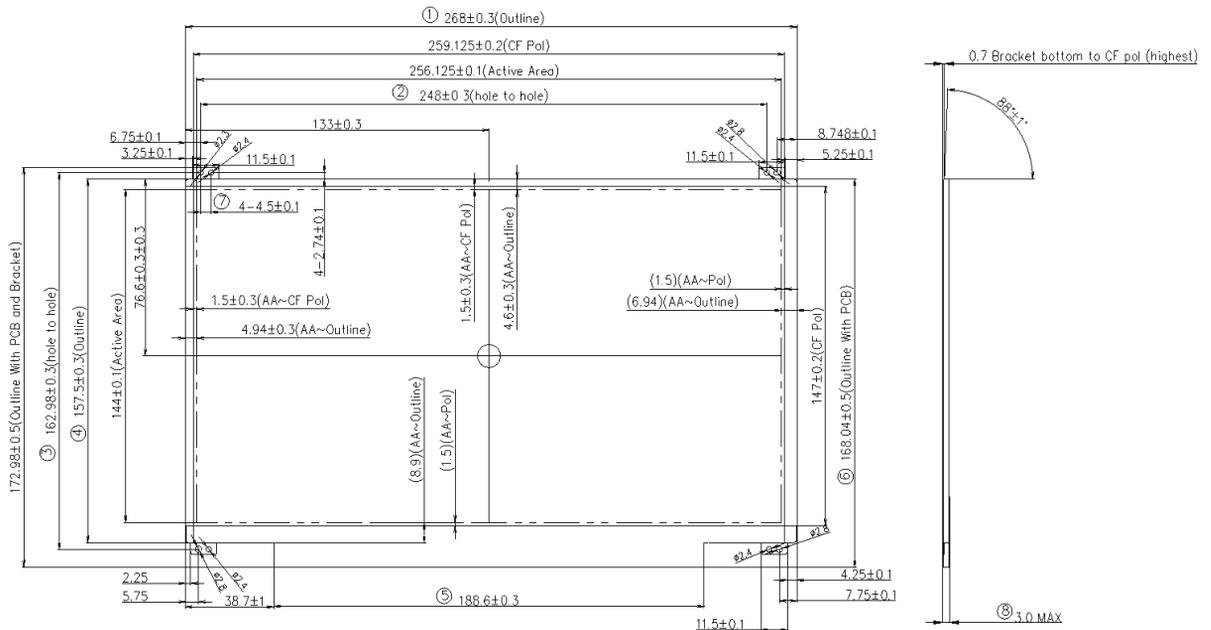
TFT-LCD Module Outline Dimension (Front View)
